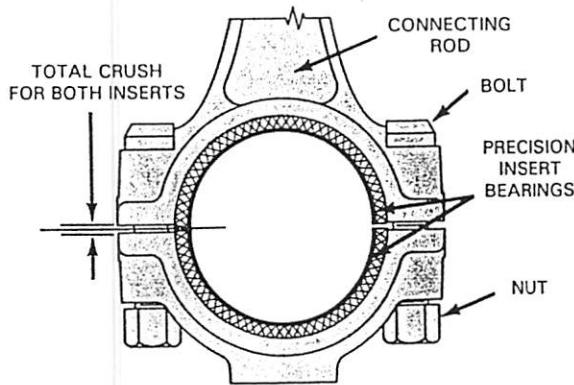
Connecting rod precision insert bearing is properly fitted when bearing parting surfaces (ends) will touch before the rod halves meet. This provides crush. (Sunnen)
